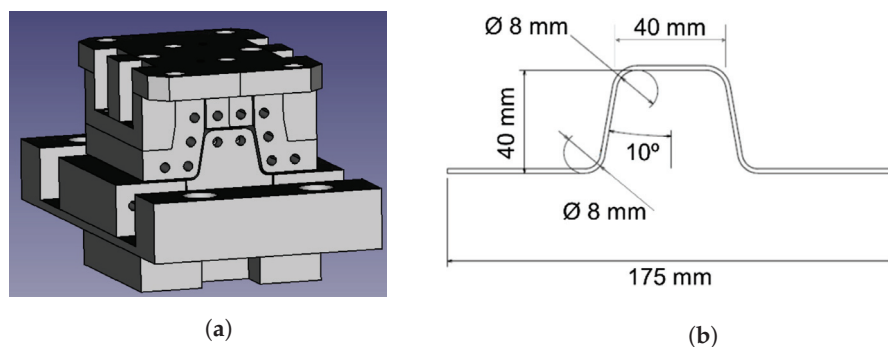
Pilot hot stamping environment. (a) Schematic of the tool assembly, including replaceable inserts; (b) Component geometry.
